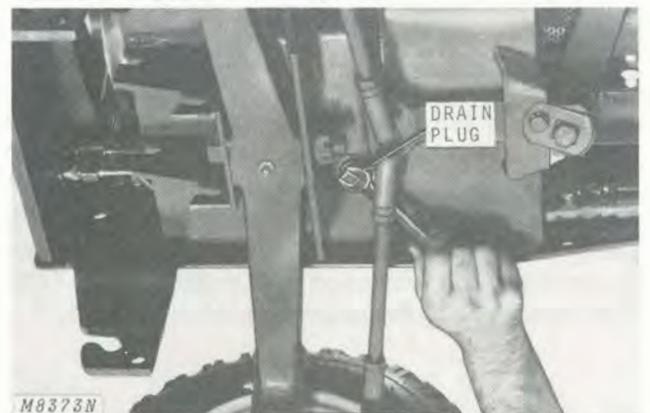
Draining Crankcase (Serial No. 30,001-56,000)
